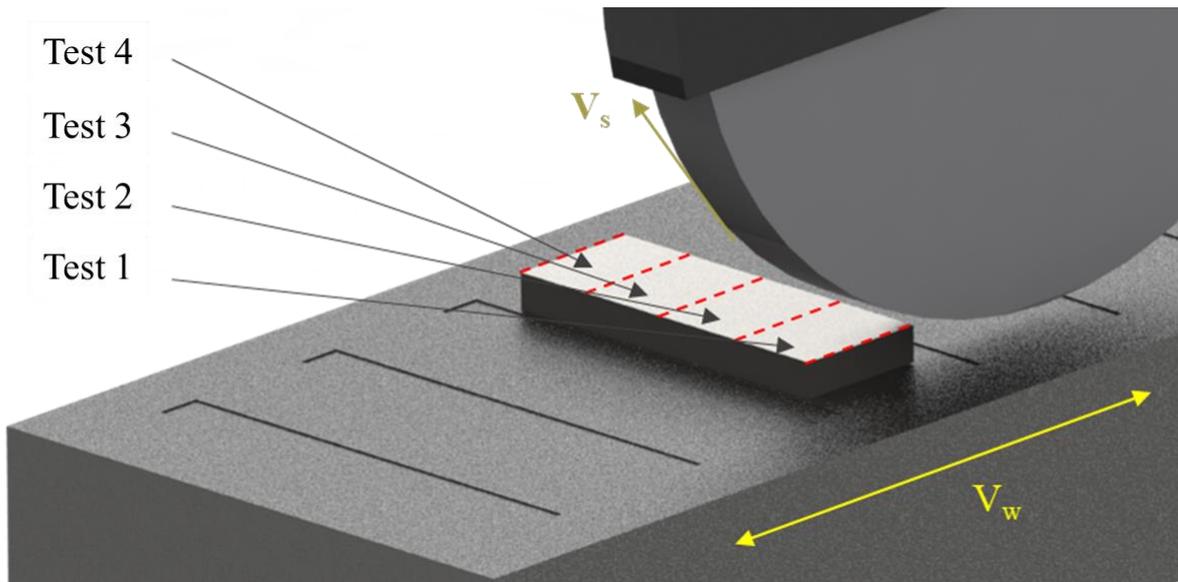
Schematic illustration of workpiece-grinding wheel system and the experimental plan carried out on the specimen.
